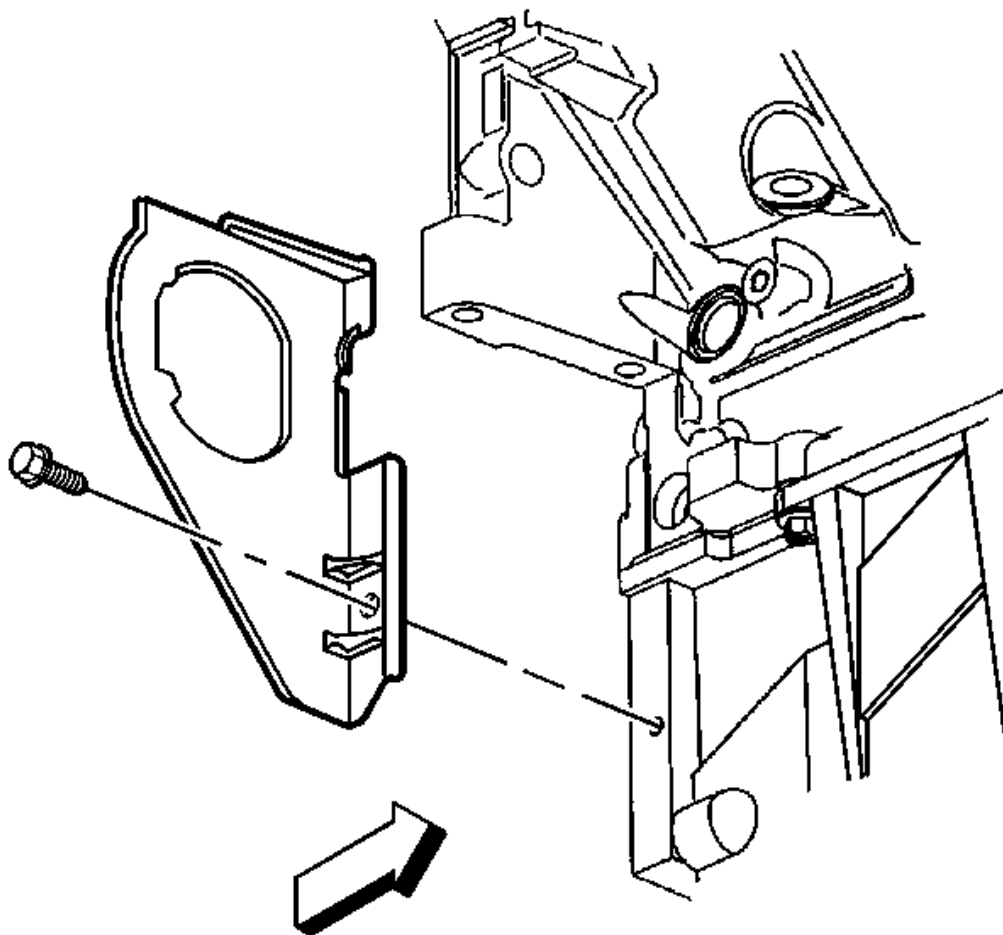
View Of Right Transmission Closeout Cover & Bolt
